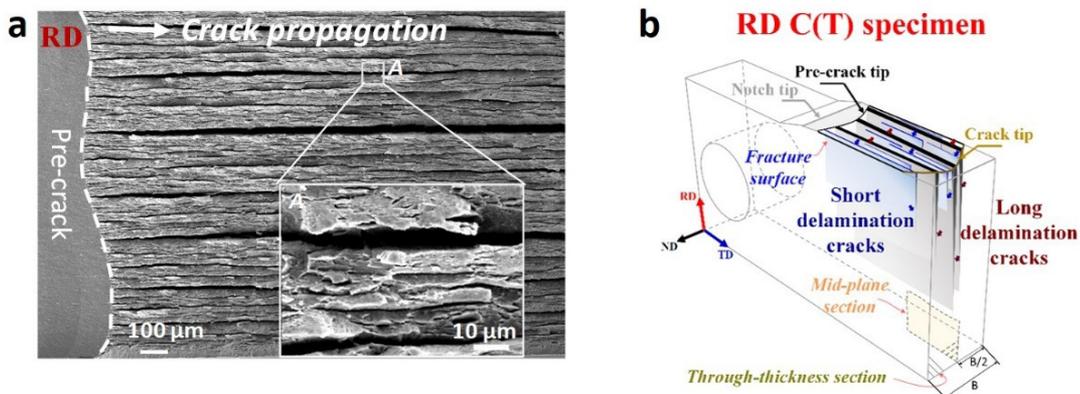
The fracture surface and schematic diagram of toughening mechanism of D&P steel. (a) The fracture surface of D&P steel, showing intensive delamination cracks. (b) The schematic diagram of the D&P C(T) specimen, showing the direction of delamination.
